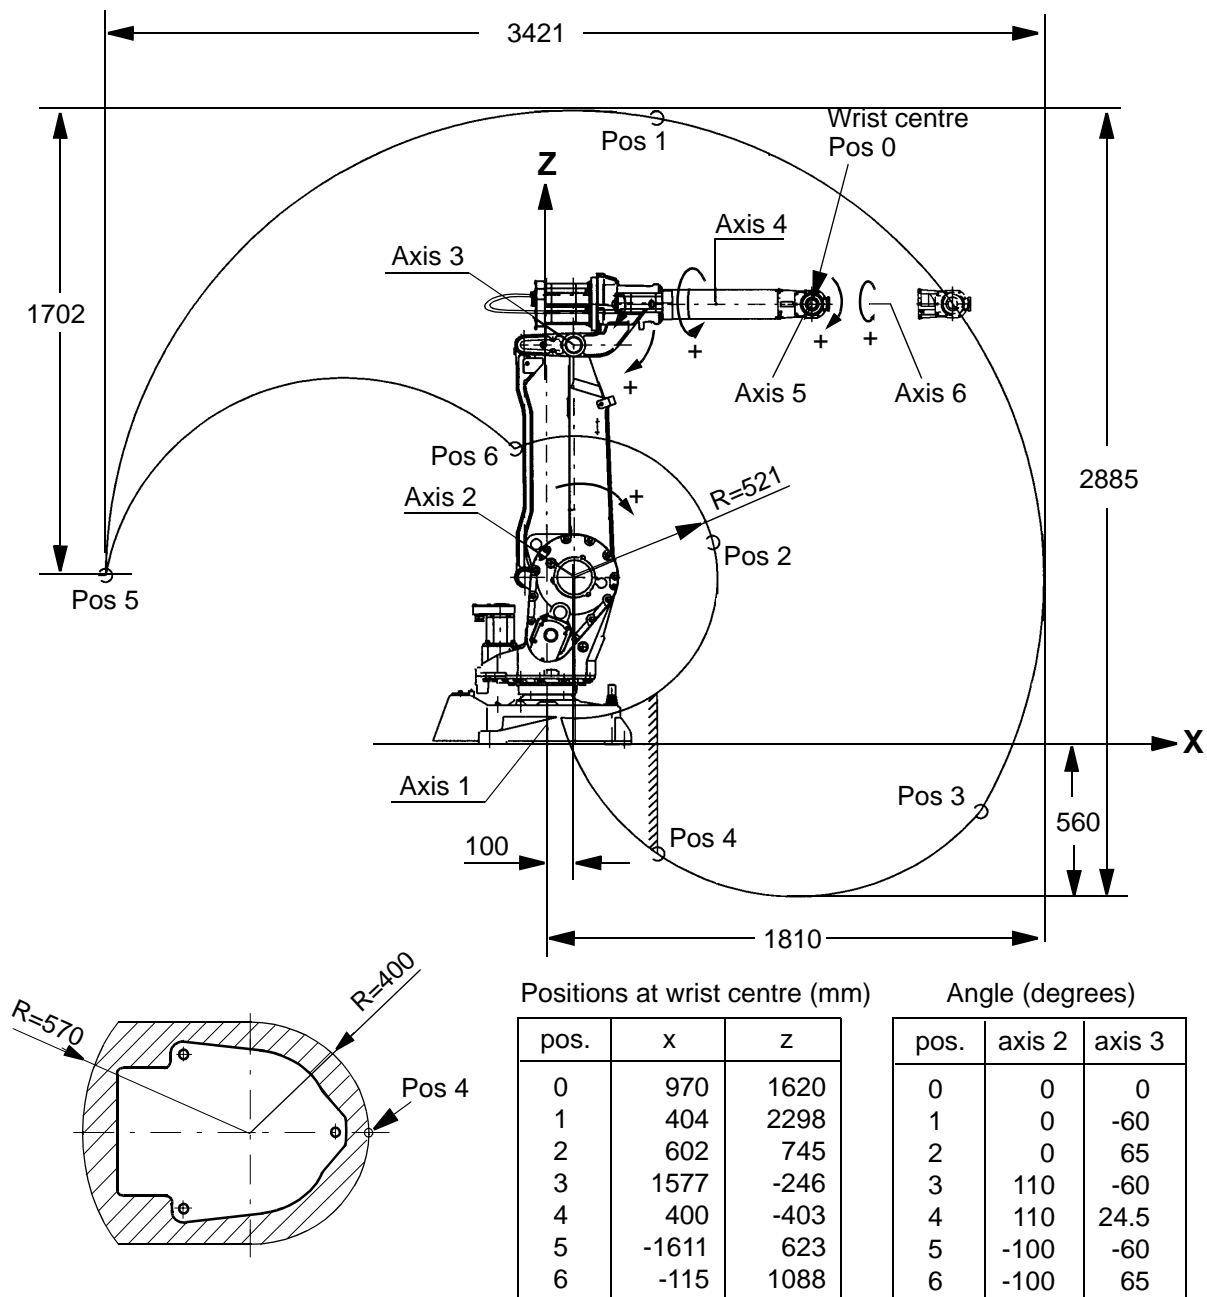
The extreme positions of the robot arm (dimensions in mm).
